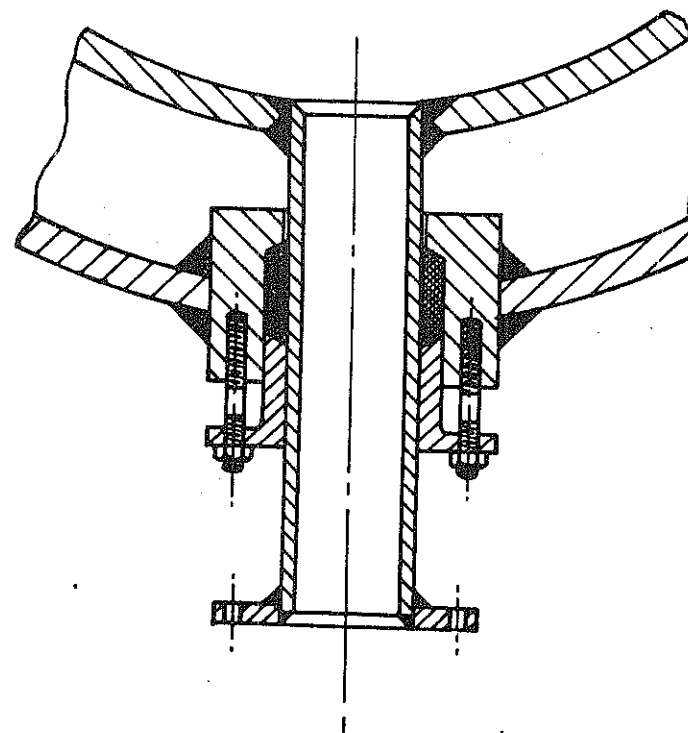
Bottom outlet pipe with stuffing box type of packing gland for differential expansion between head and jacket
